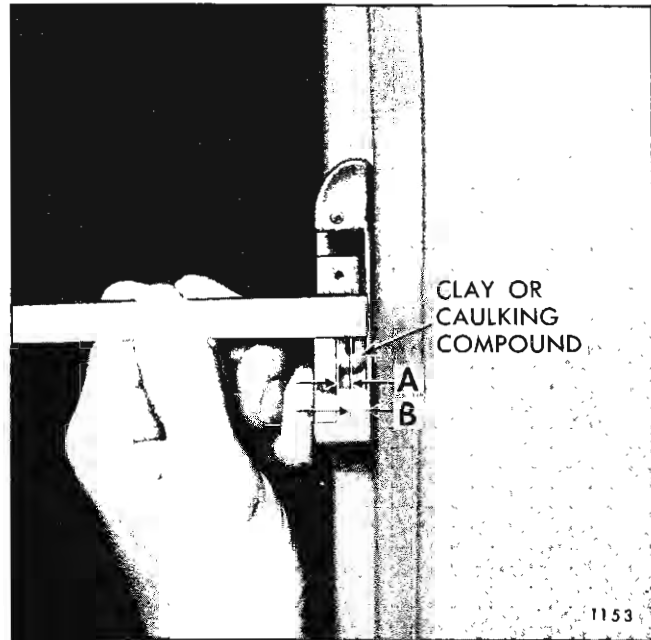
F31—Tail Gate Lock to Striker Engagement Check
